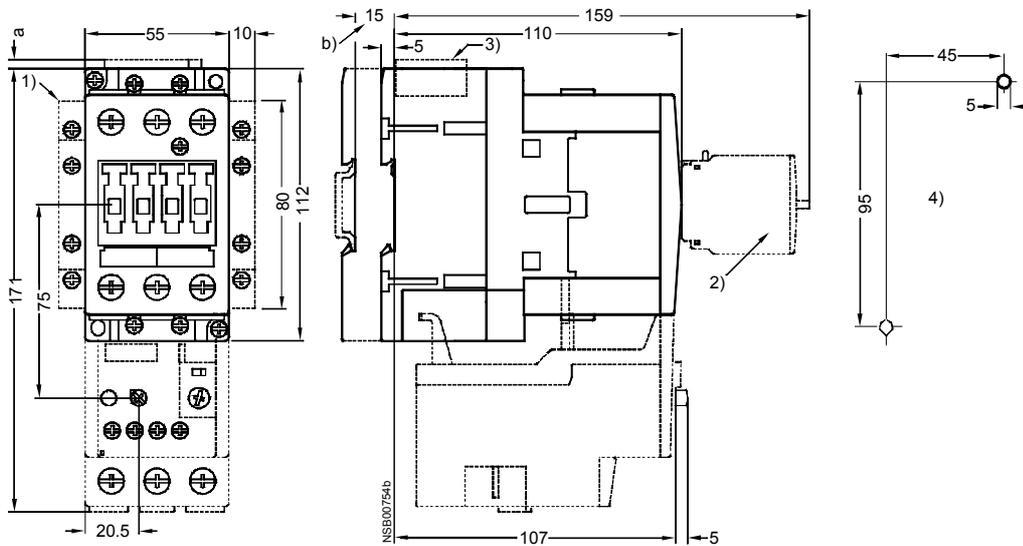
3RT10 3 contactors with surge suppressor, auxiliary contact block and installed overload relay
